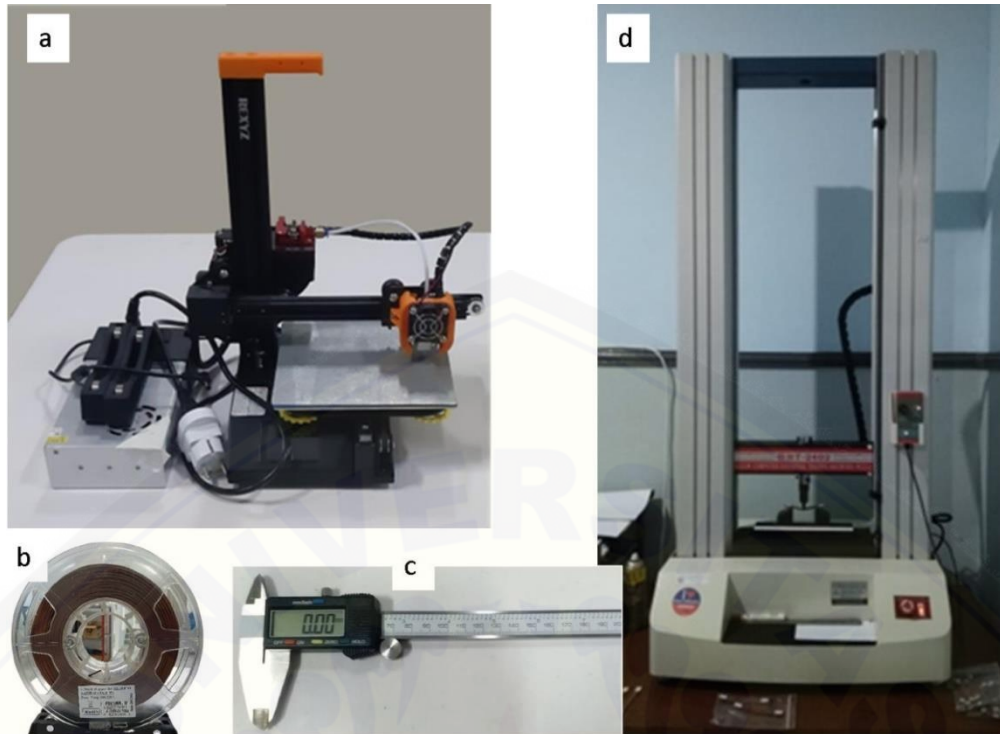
The equipment used for experimentation: (a) REXYZ A1 3D printer machine, (b) the copper-PLA filament, (c) a digital micrometre of 0.01 mm accuracy, and (d) UTM HT-2402 testing machine
